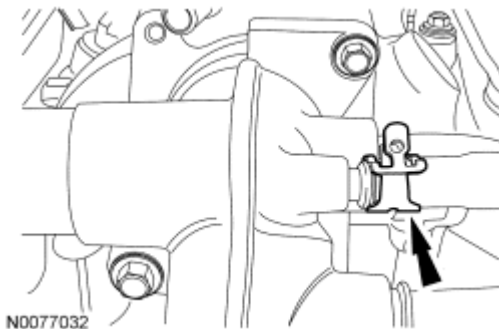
Identifying Coolant Bypass Hose From Thermostat Housing
